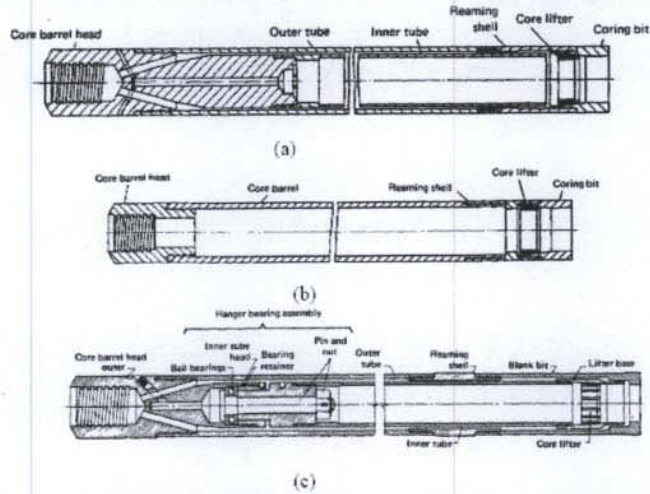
(a) Single Tube Core Barrel; (b) Rigid Type Double Tube Core Barrel; (c) Swivel Type Double Tube Core Barrel, Series "M" with Ball Bearings. (Courtesy of Sprague & Henwood, Inc.)
